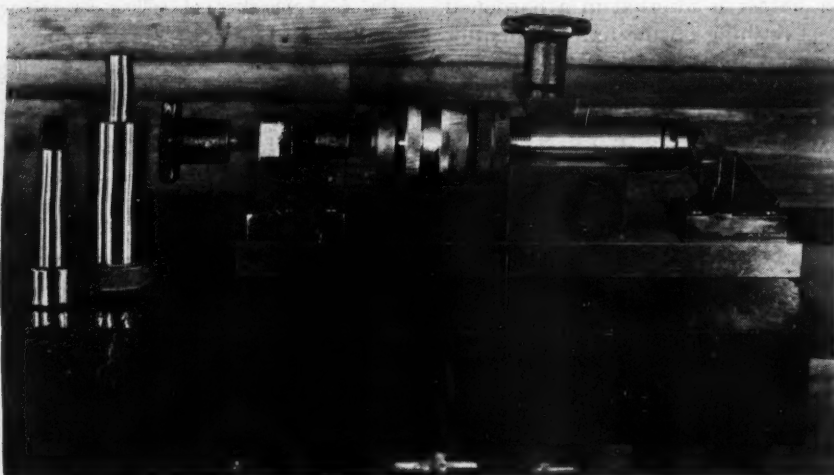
Cutter-setting gage with holder in position; also, flush-pin gage and driver.
